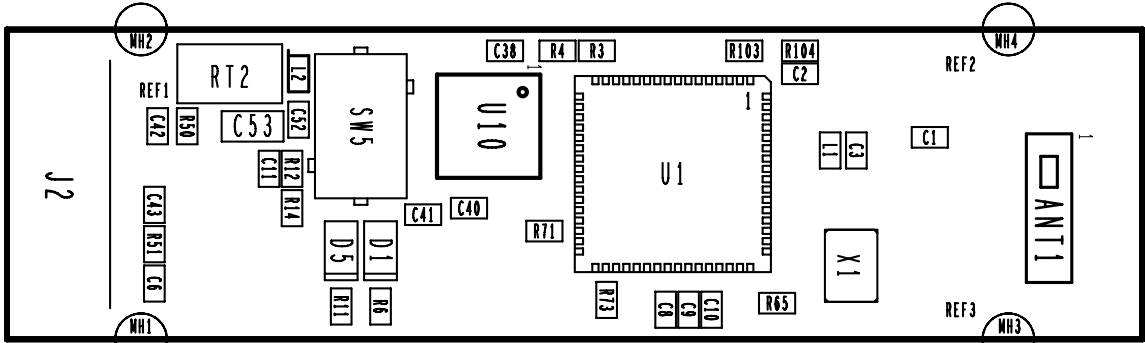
1322x USB Dongle PCB Component Location (Top View)
